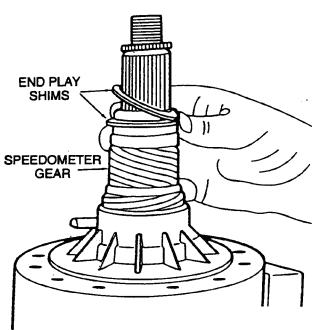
Remove End Play Shims and Speedometer Gear
